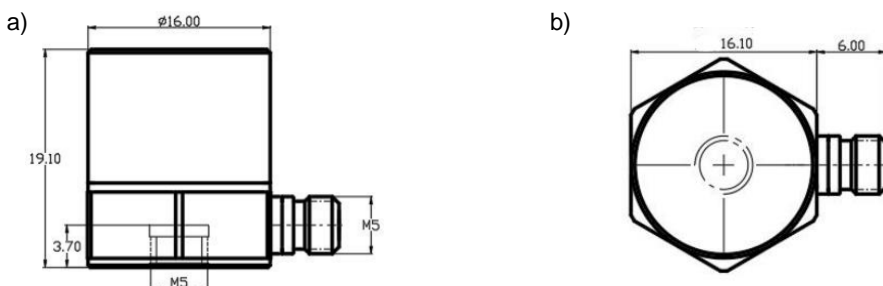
Mechanical dimension SSA-P8UCA4 and SSA-P8UCA3 a) side view b) top view
